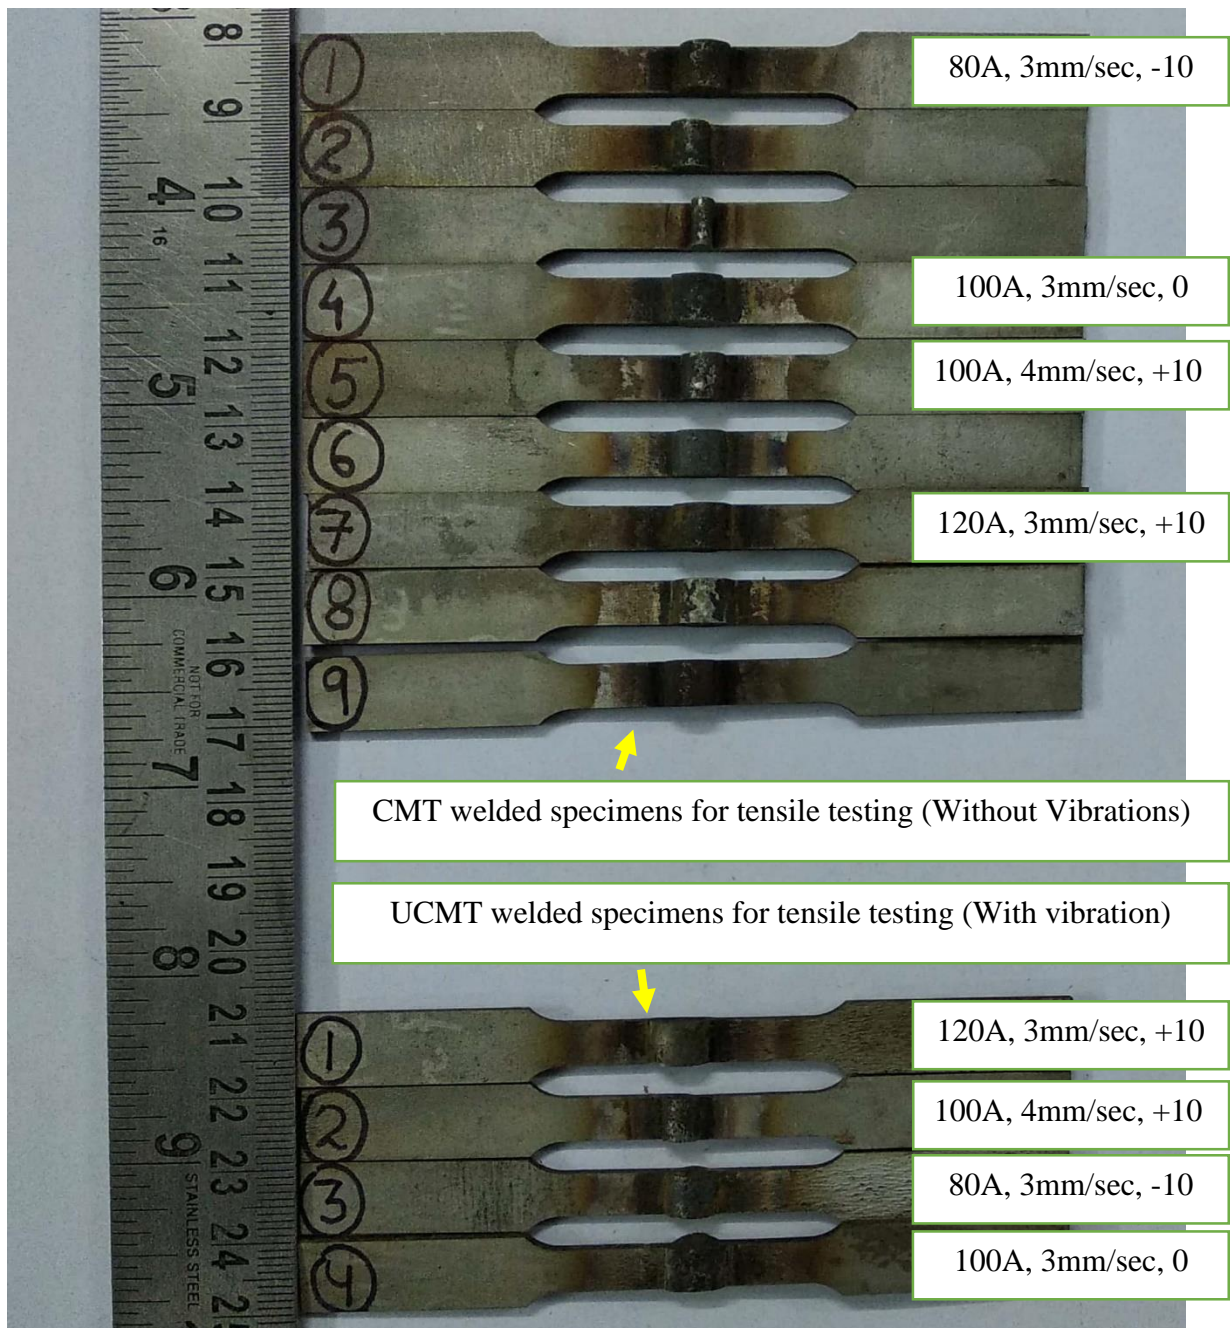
Test specimens cut for Tensile Testing from CMT welded (without vibrations) Samples and UCMT welded Samples (with vibrations)
